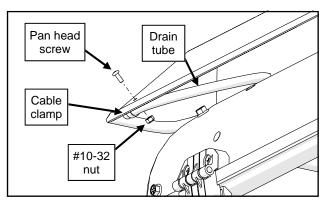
(Attach Drain Tubes to Outer Roof)
